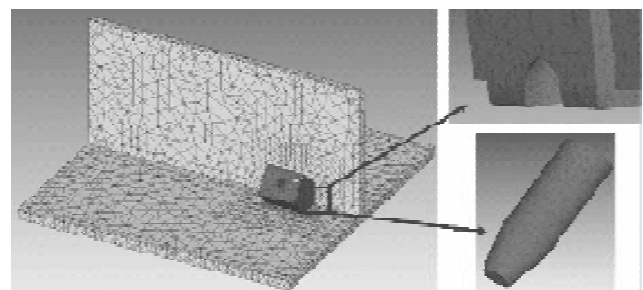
sketch of the utilized model highlighting tool and shoulder details.
